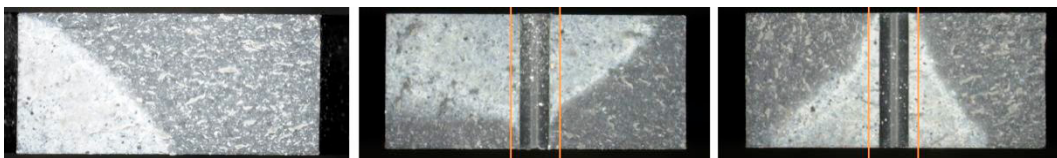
Representative fracture surfaces of A2 adhesive: un-notched (left), notched-LCF (center) and notched-HCF (right)
